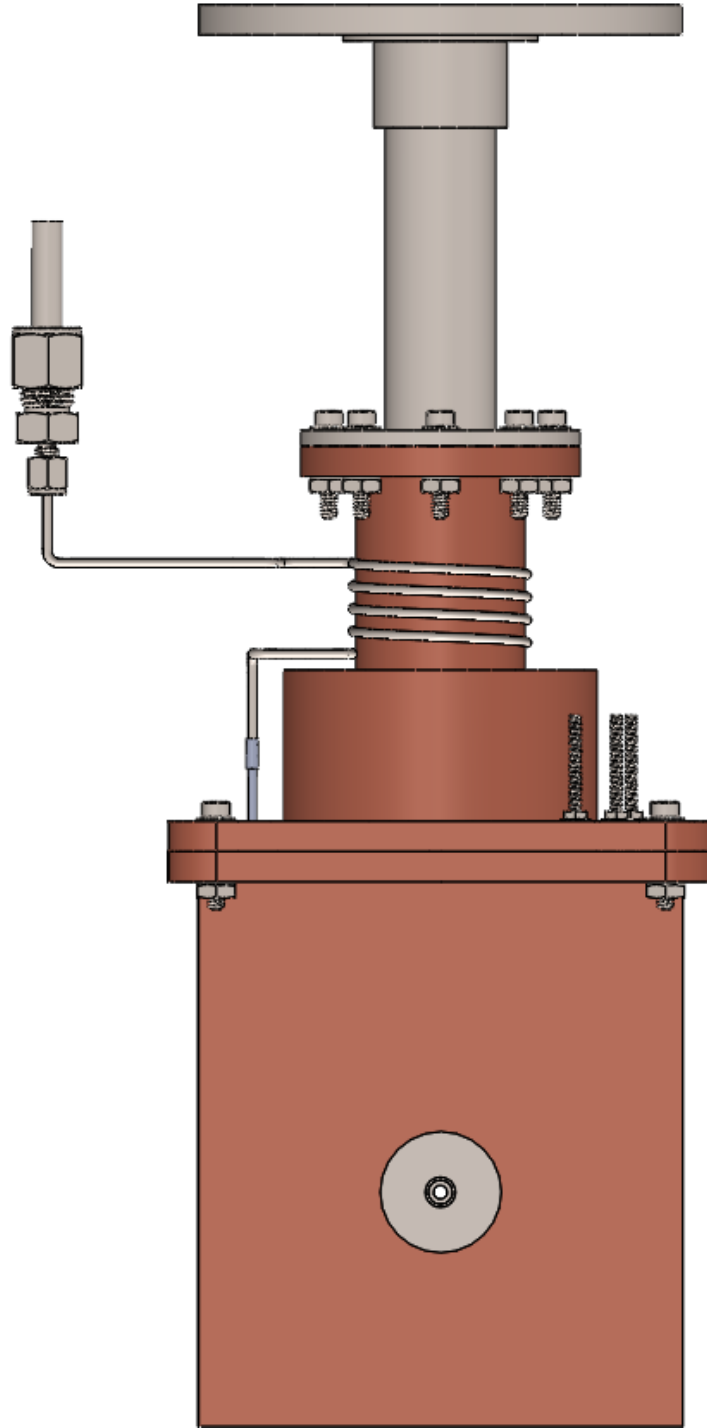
Normal view of the QIT and shielding assembly attached to the cold head arm, drawn to scale. Buffer gas tubing included.
